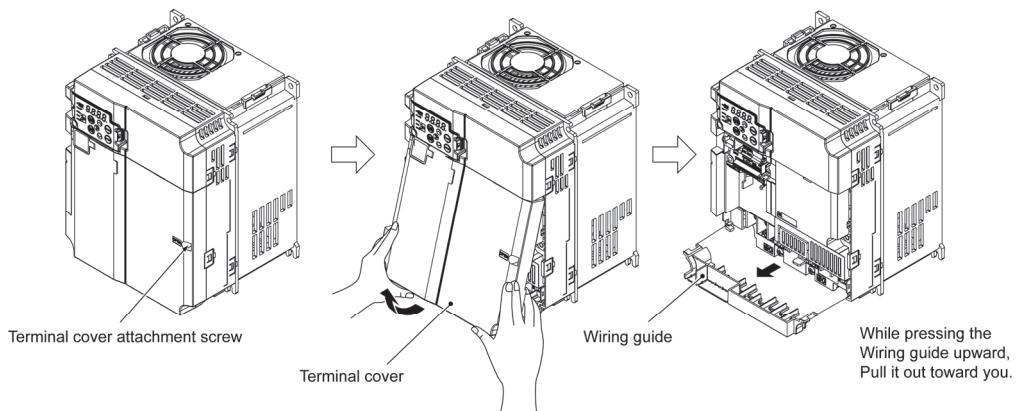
Removal of the Terminal Cover and the Wiring Guide (for FRN15E2S-2J)
